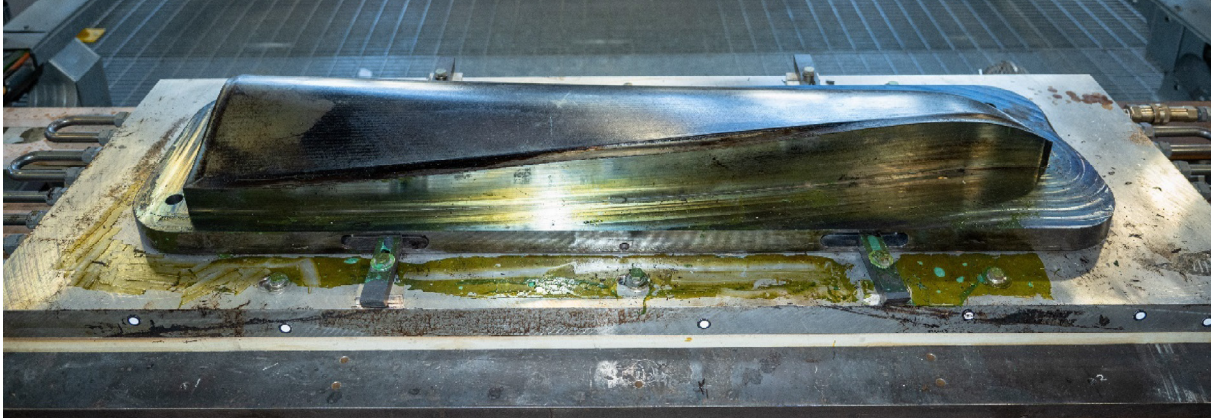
Bottom propeller skin mold used for compression mold manufacturing.
